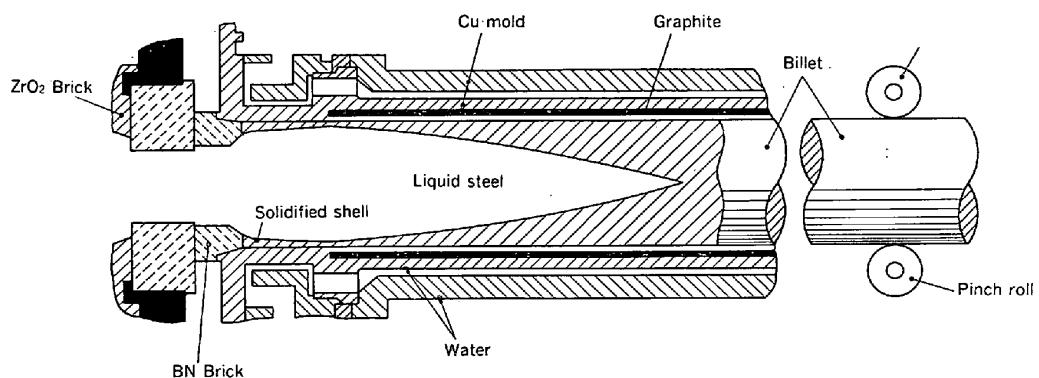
Section of tundish-mould arrangement⁴⁾.
